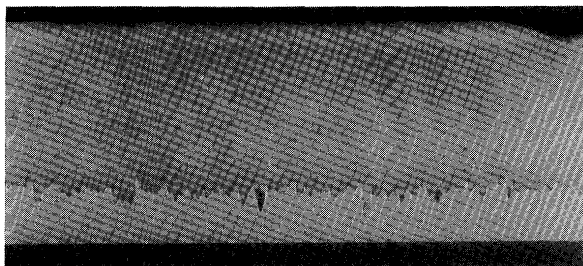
Formation of spiking (from welding run No. 4)
